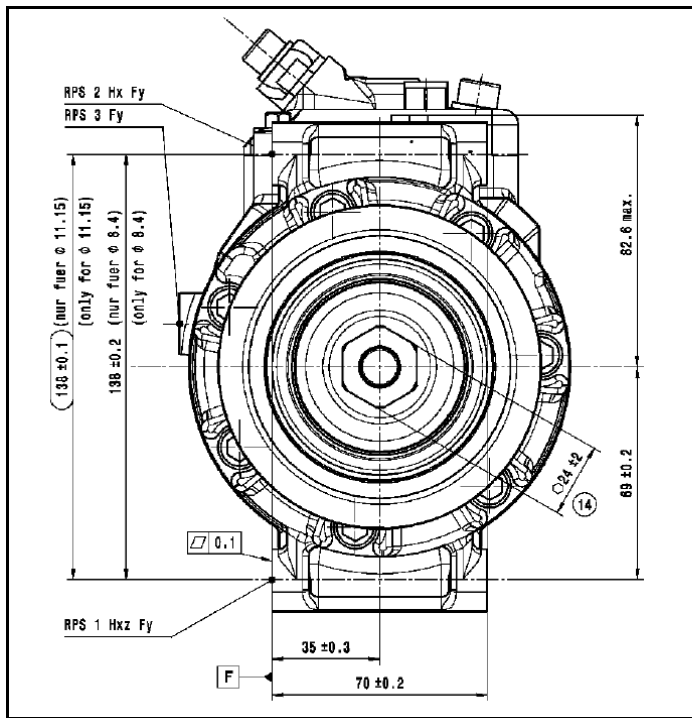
Dimensions of air-conditioning compressor Denso 7SU17 (7E0.820.803) (front view)
